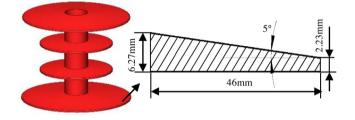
3D model of the composite insulator and the cross-sectional drawing of silicone rubber shed.
